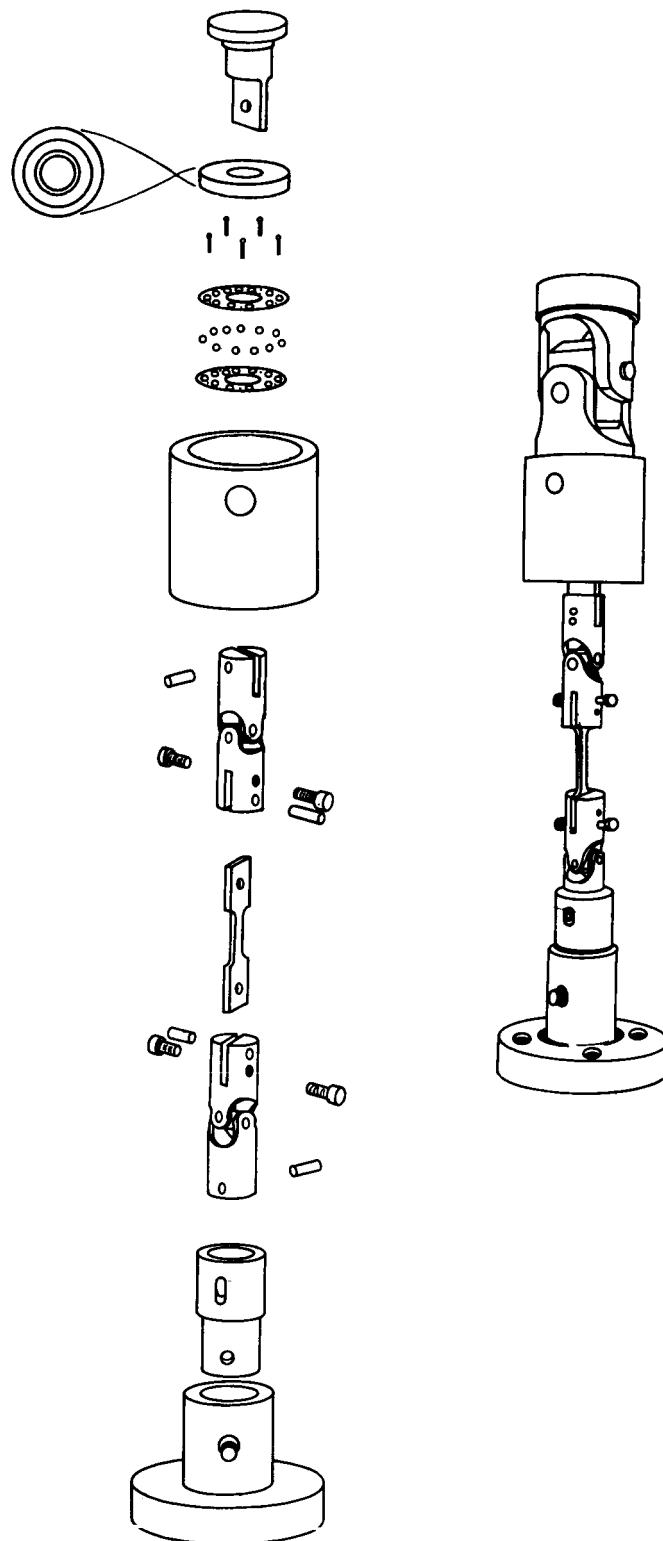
EXPLODED VIEW OF MYS LOAD TRAIN
